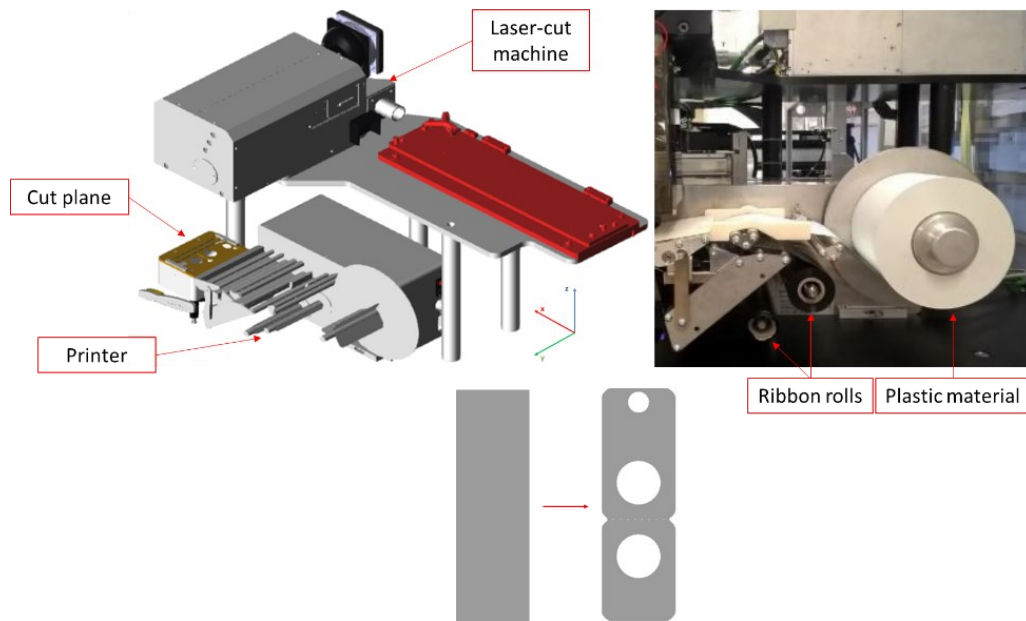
Printer and laser-cut machine above and the plastic card shape at the end of the cut process below
